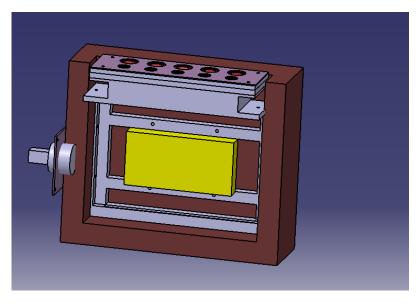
Cutaway view of the upper box. Arduino and electronic components unit are shown.
